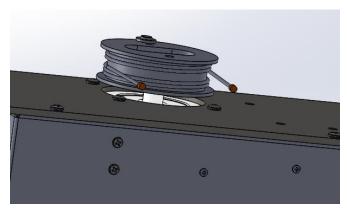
E-Lift Motor Double Pulley Cables (right side view)
